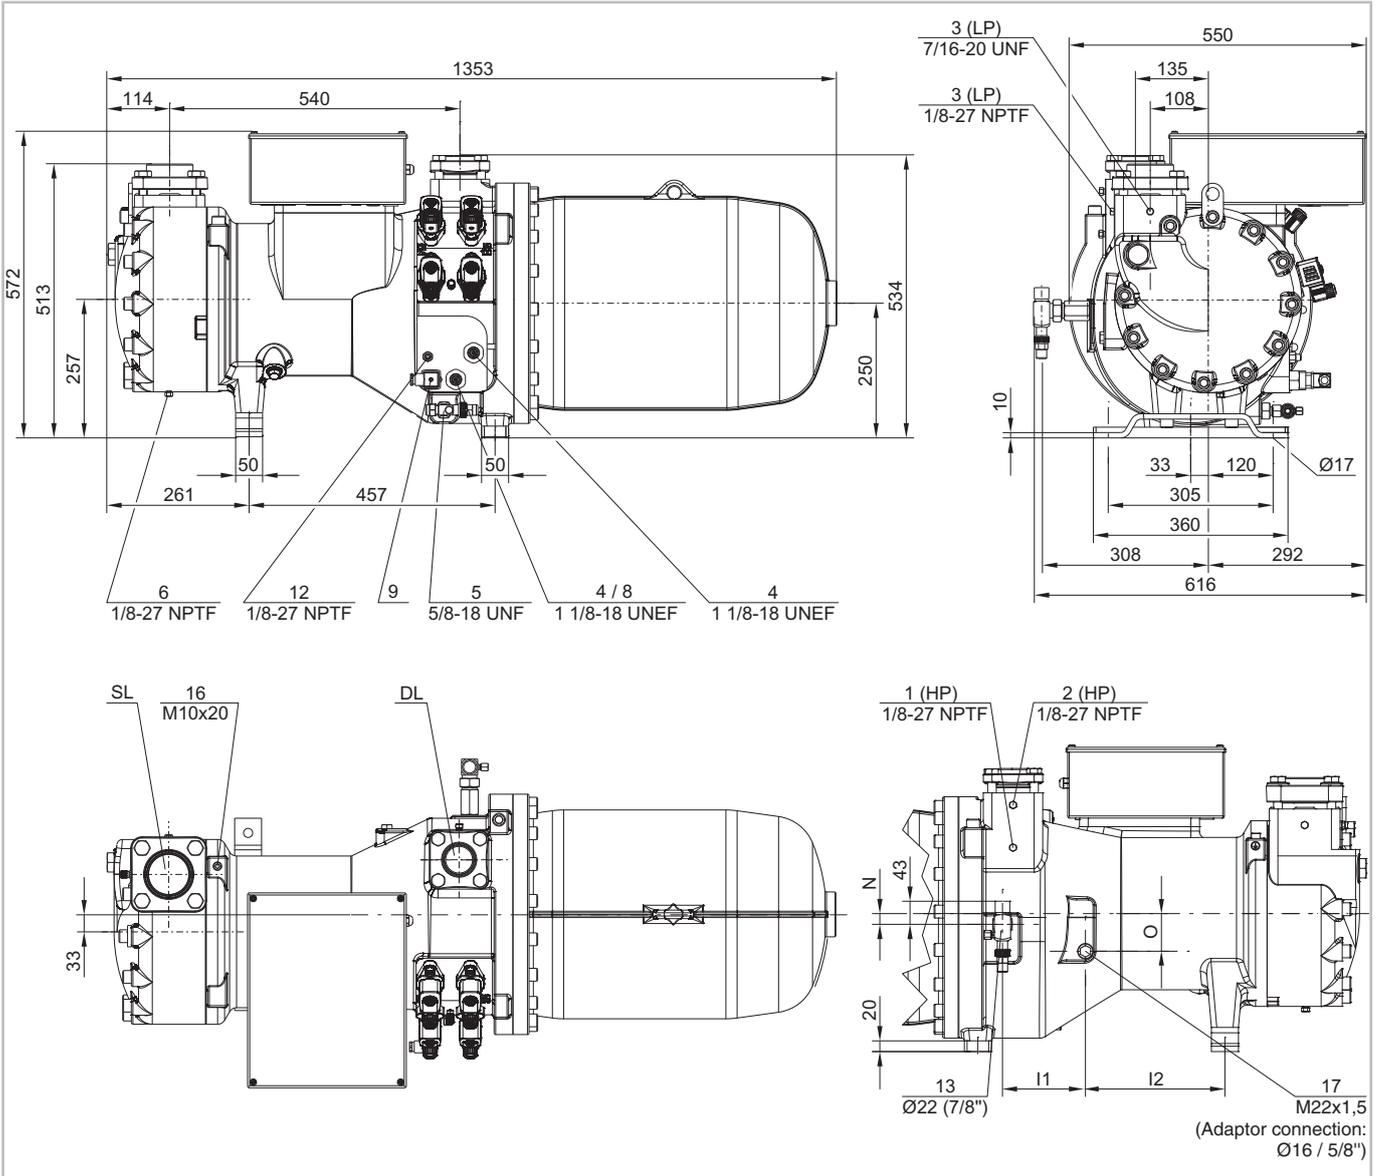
Dimensional drawing CSW7573-60Y .. CSW7593-90(Y), CSH7673-70Y .. CSH7693-90Y
